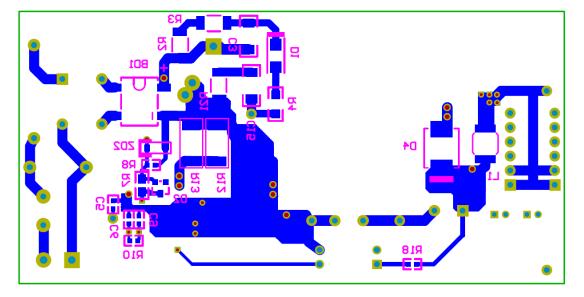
Silkscreen/Component Placement of Bottom Side Layer
